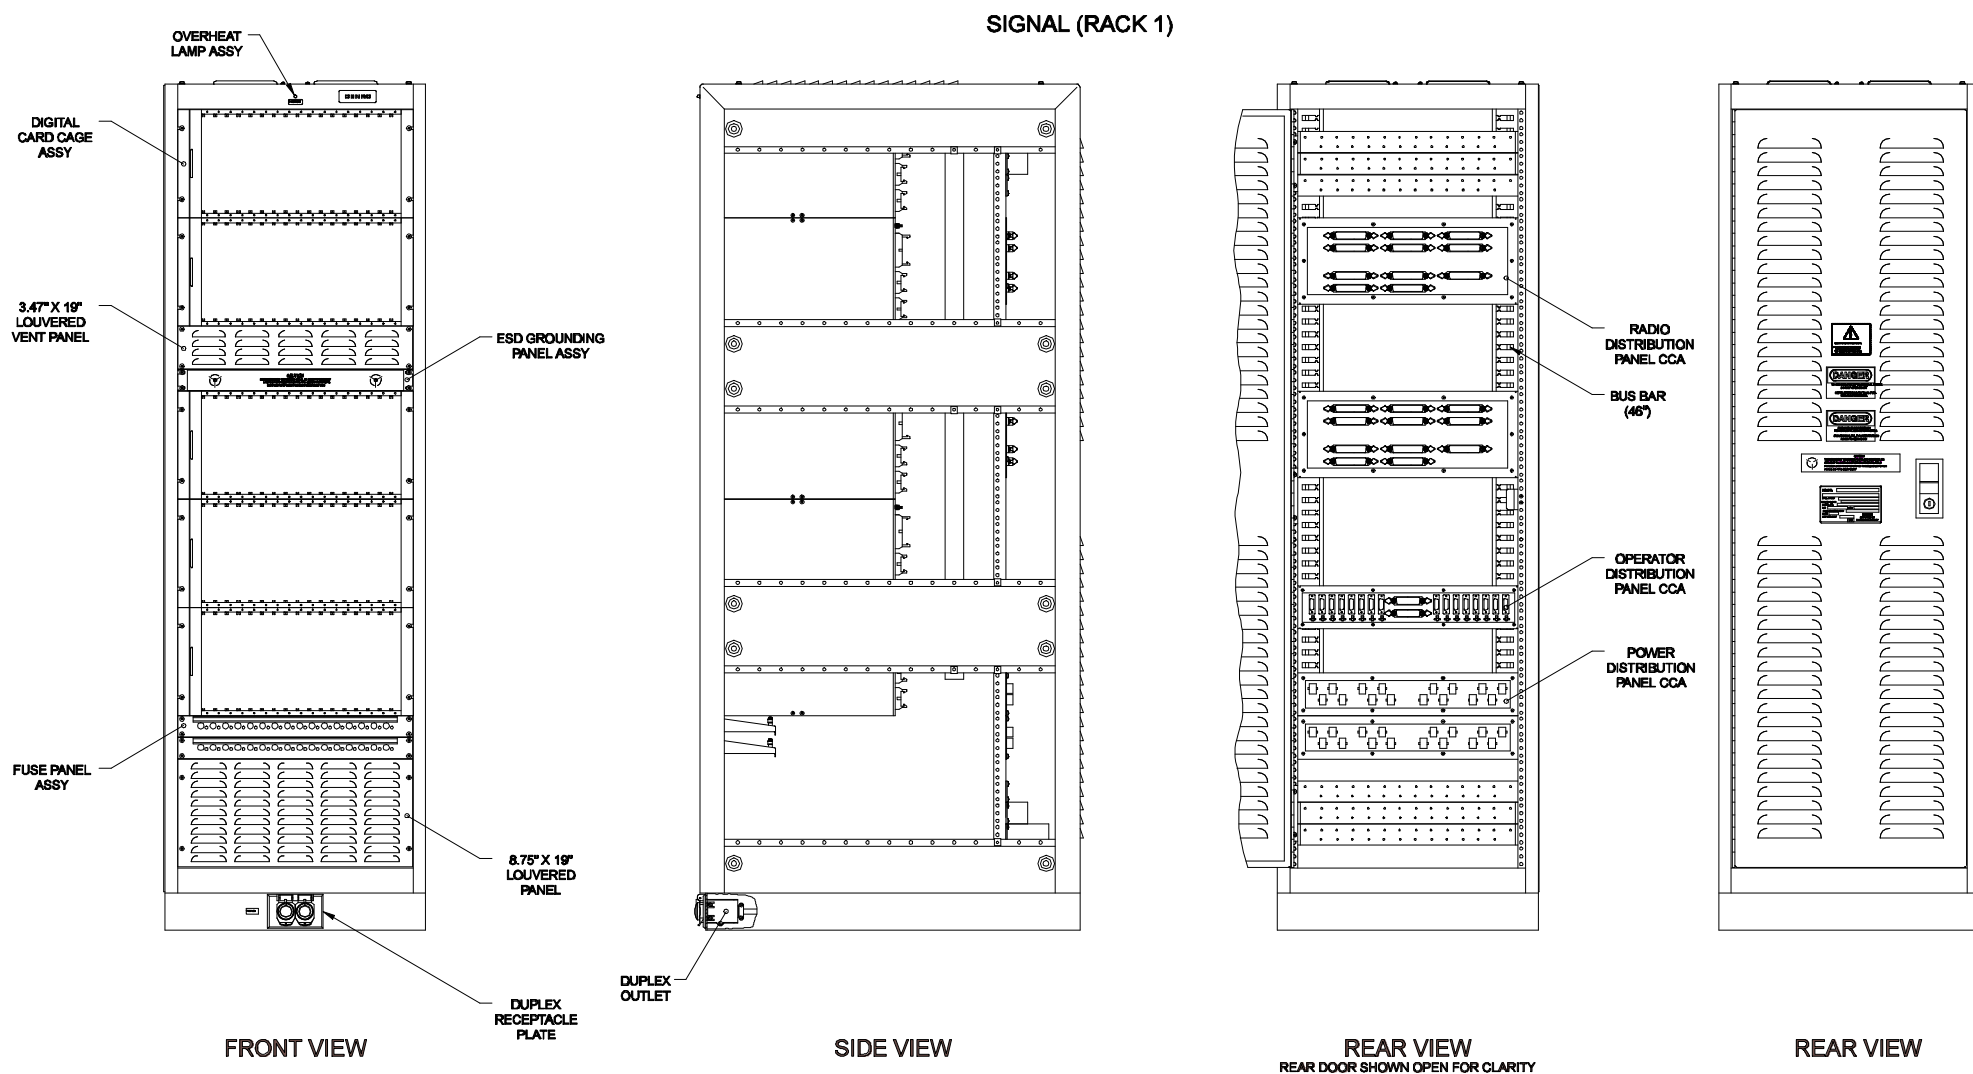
Basic ETVS System 4 (BS-4); Racks 1-7; Front, Side, and Rear Views (Sheet 1 of 7)
